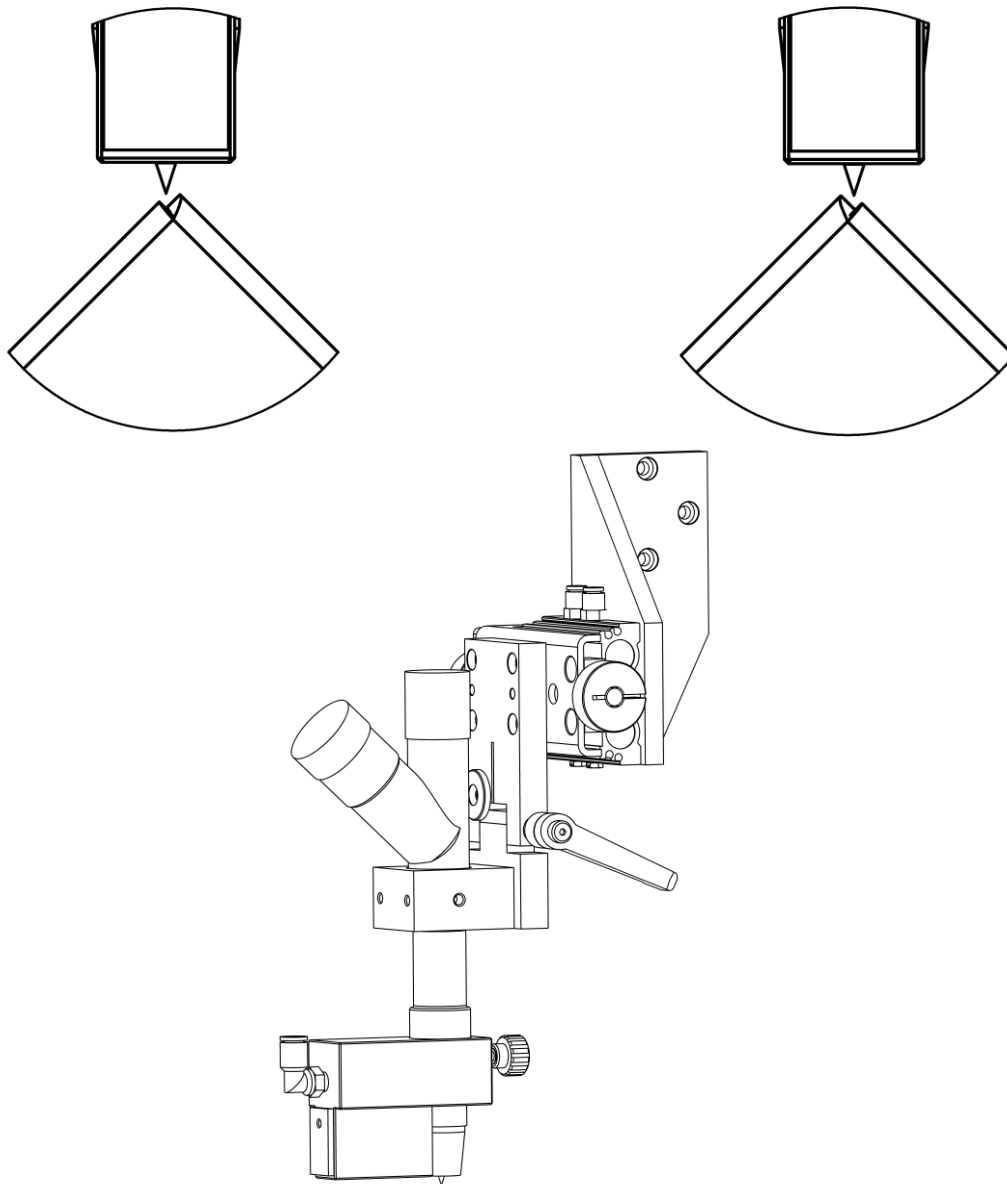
Torch shift unit for welding left and right Corners, Item: 1037432
